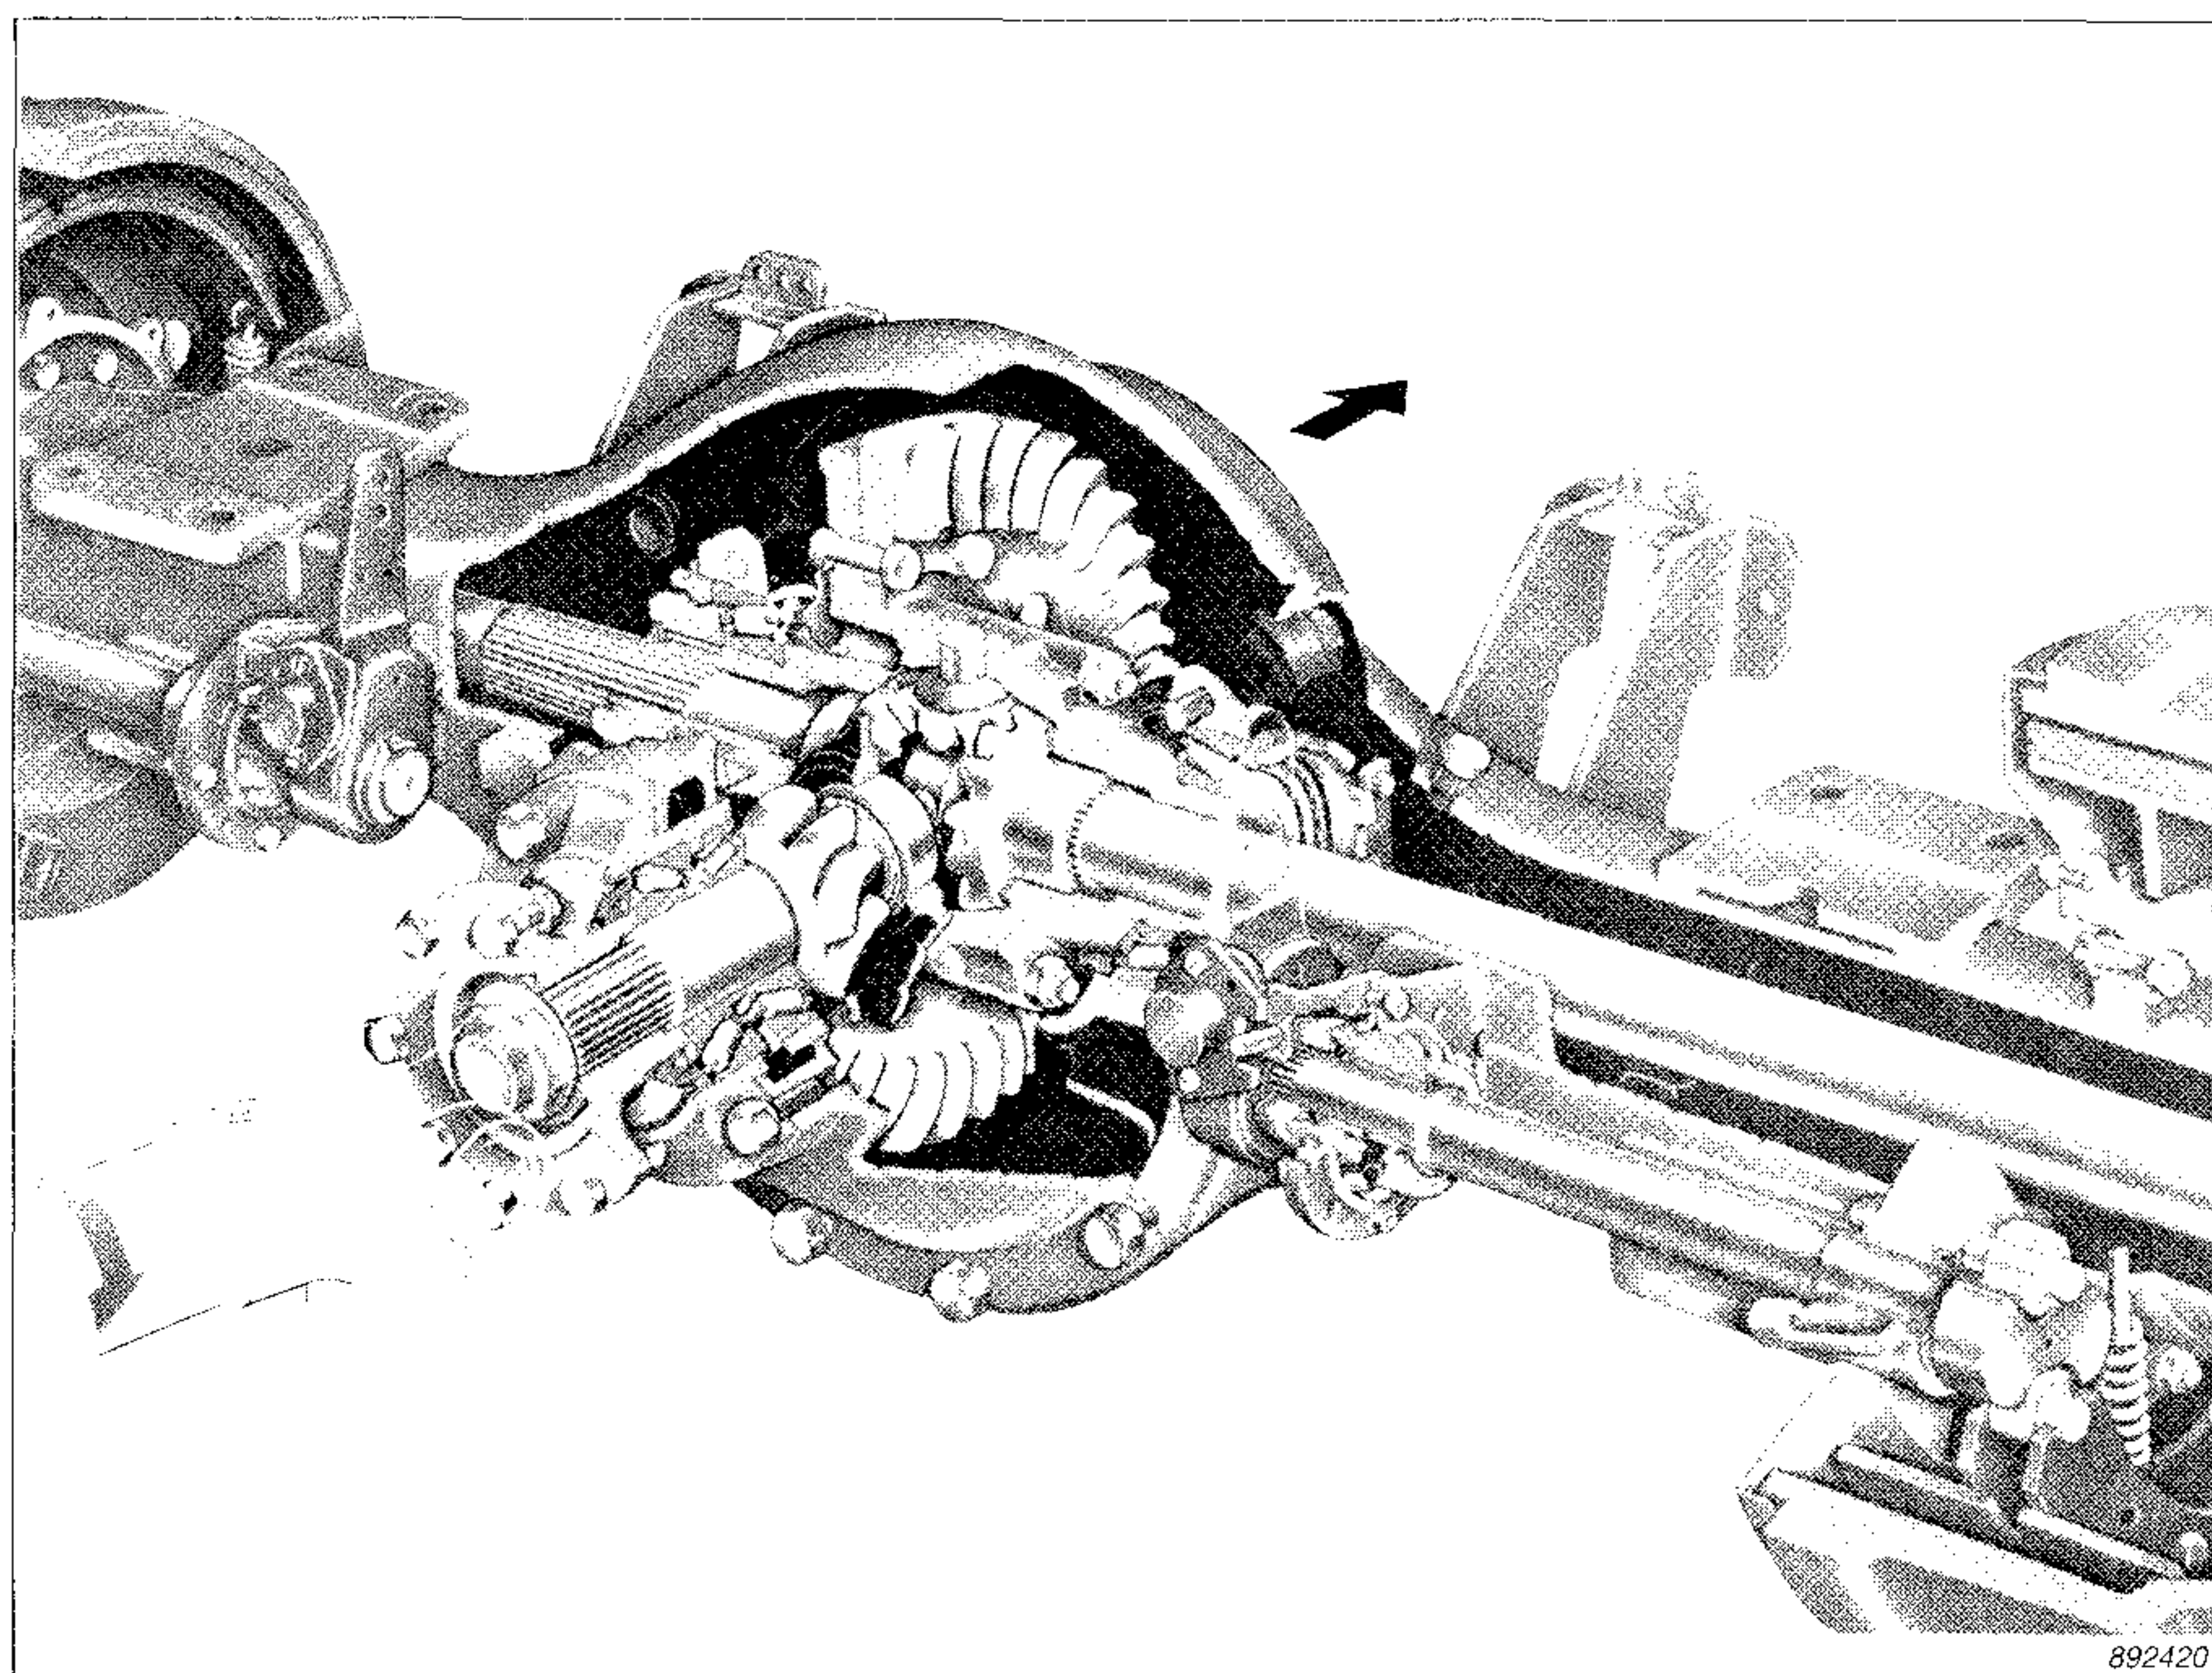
Cut-away drawing showing the arrangement of gears in the axle
